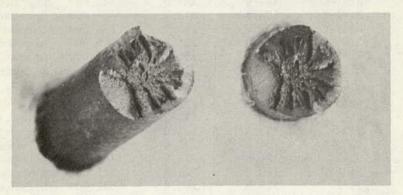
Typical fatigue failure of wire (specimen 2134).
